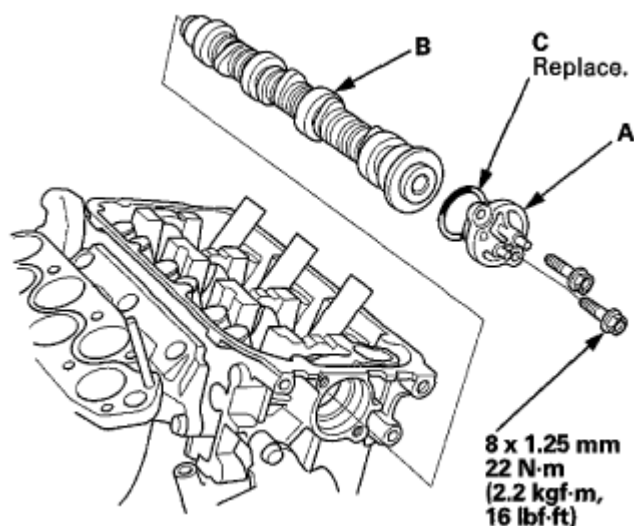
Identifying Thrust Cover, Rear Camshaft, O-Ring And Mounting Bolts Torque Specification
